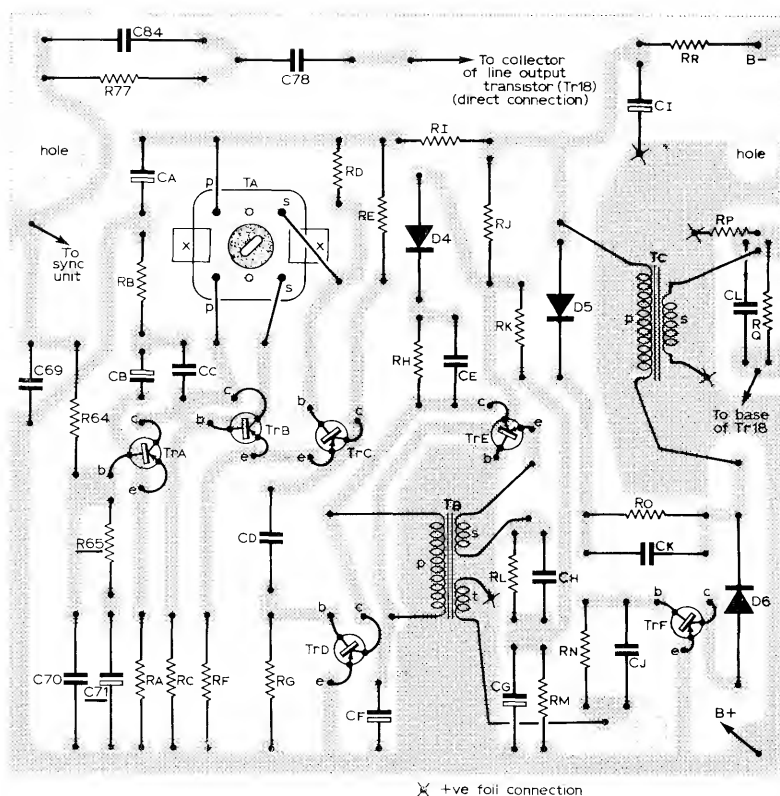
The printed board PC4 for the line timebase (the copper parts are shown shaded).
